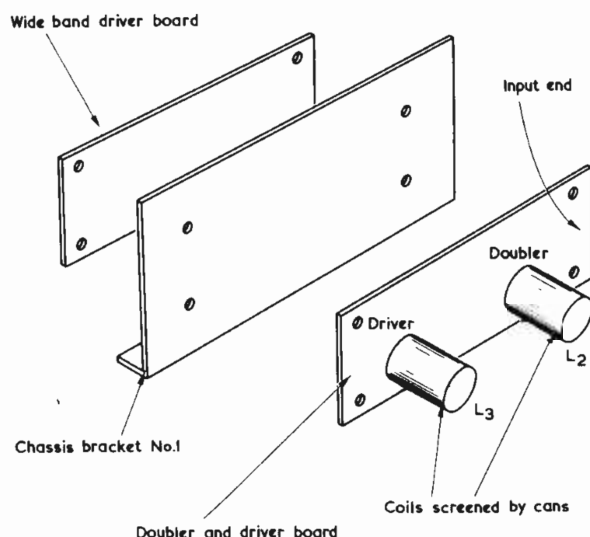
The doubler and driver board is mounted on Chassis Bracket No.1 on the opposite side to the wideband driver board
